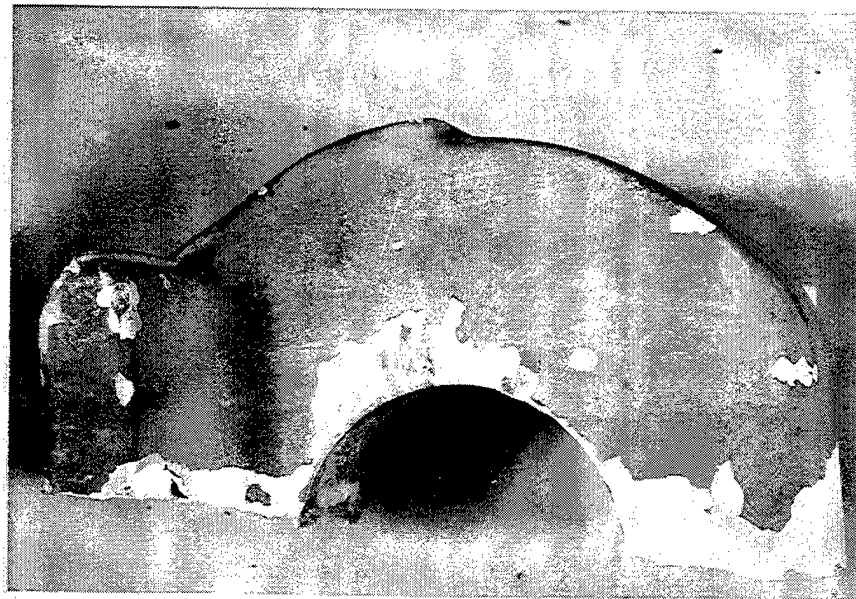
A side view of the broken eyehole section from the failed outboard female bottom connector (outboard forged part). It was removed from a female center panel assembly of the No. 2 Modified AVLB after the bridge's second failure during the fatigue tests. The connector part broke across the 3-in-diameter eyehole for the connector steel pin.
